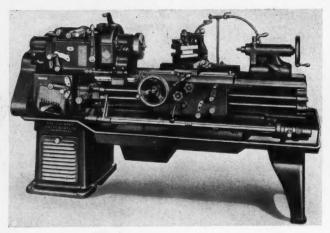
Cincland "Maxi-Production" Geared Head Late
